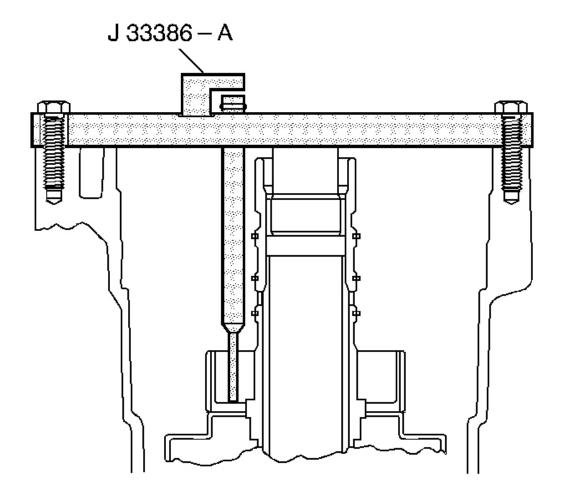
View Of J 33386-A Installed Onto Transmission Case Courtesy of GENERAL MOTORS CORP.
